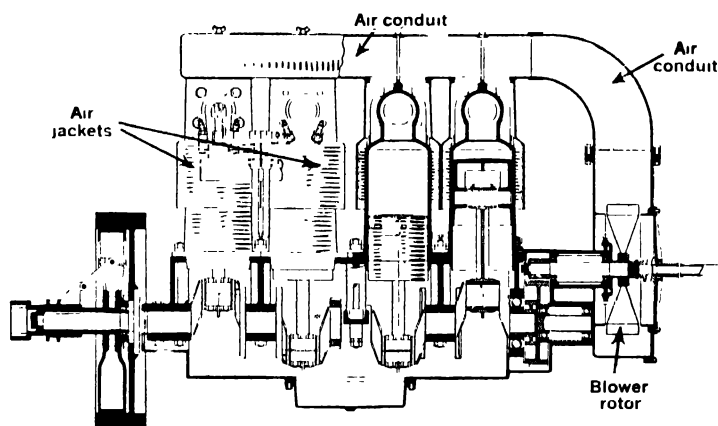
The Frayer-Miller Blower Cooled Automobile Engine Was the Parent Type of the Pipe and Renault Air-Cooled Aviation Engines.
